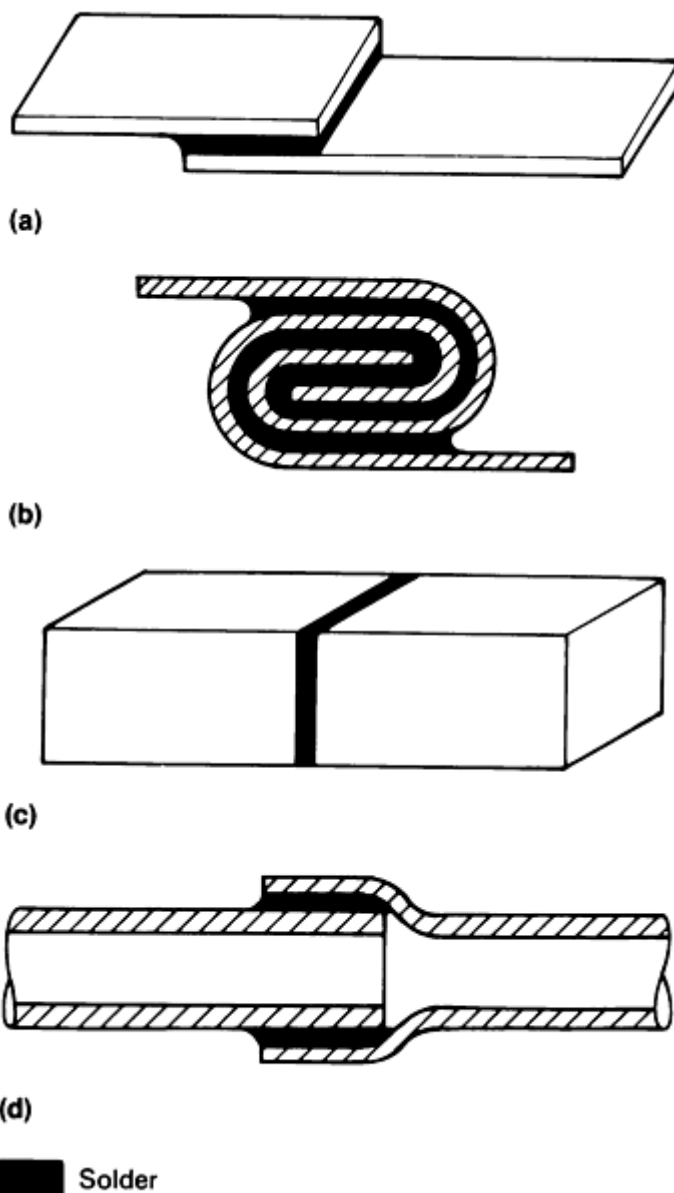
BASIC JOINT CONFIGURATIONS USED FOR SOLDERING APPLICATIONS. (A) LAP JOINT. (B) LOCK SEAM JOINT. (C) BUTT JOINT. (D) PIPE JOINT
